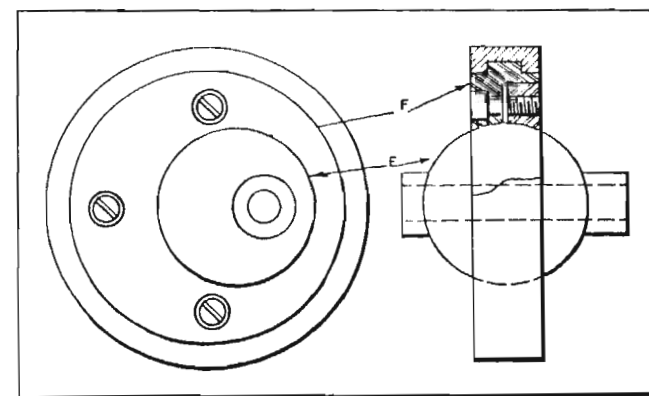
Eccentric Adjustable as to Throw and Angle Relative to Shaft
